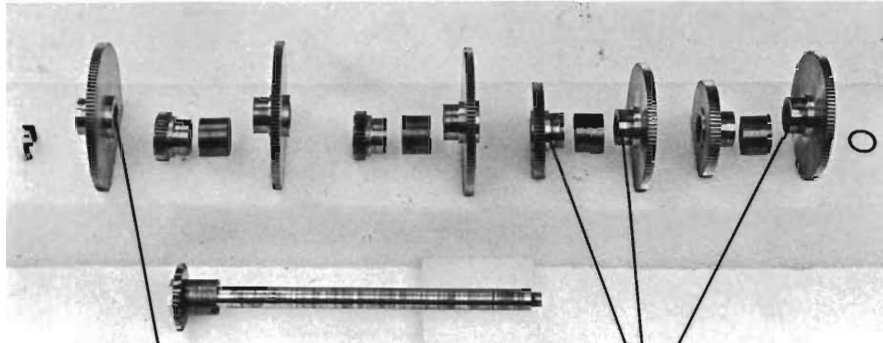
Spring Clutch Lubrication (Primary Shaft)
